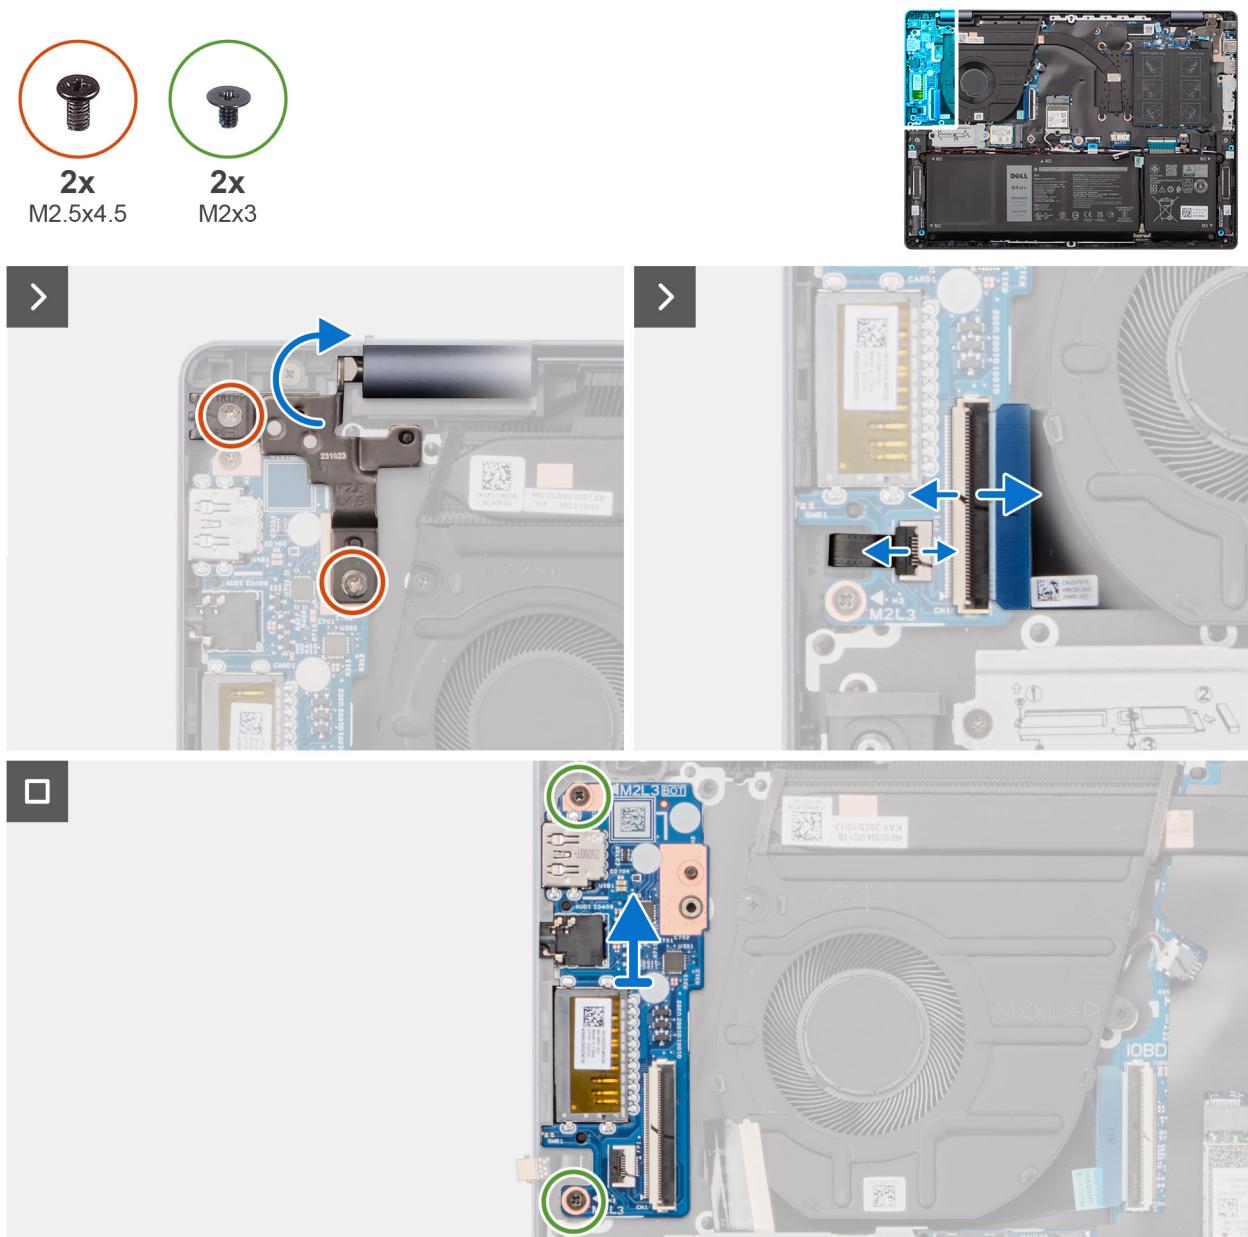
Removing the I/O board (for computers shipped with an aluminum chassis)
